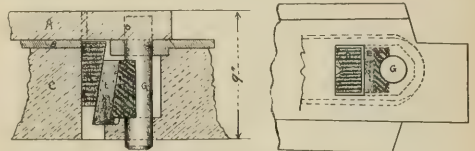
HEEL PIN TIGHTENING DEVICE.
